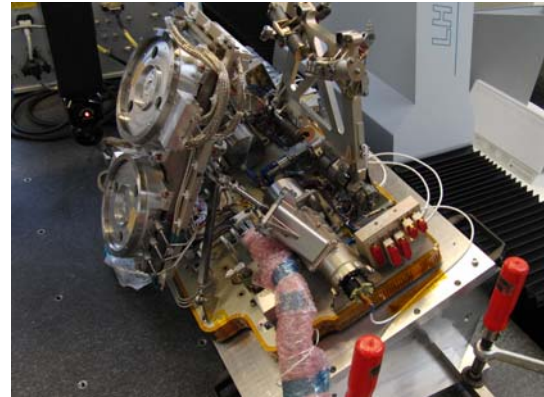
TPM QLTM (at 3D Measurement) HDRM deployed
